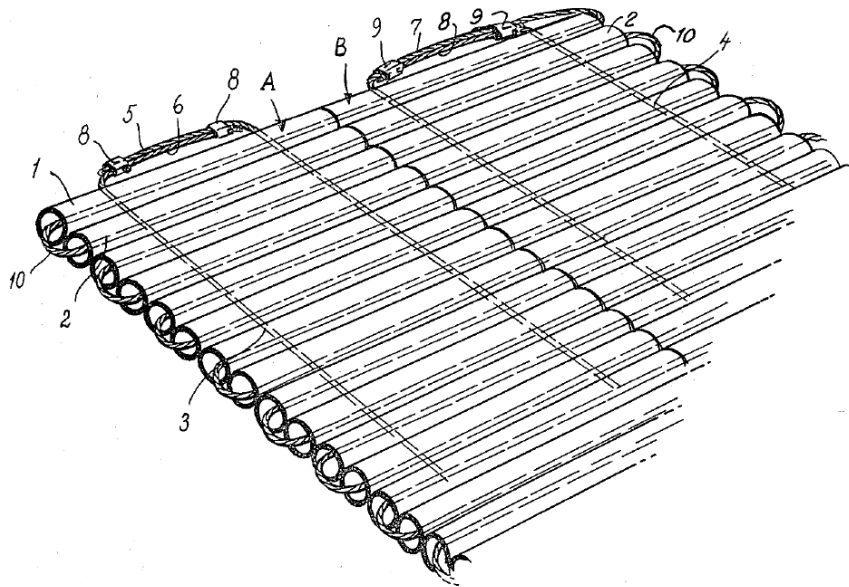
Wikner Pipe and Cable Isometric View (Wikner)
